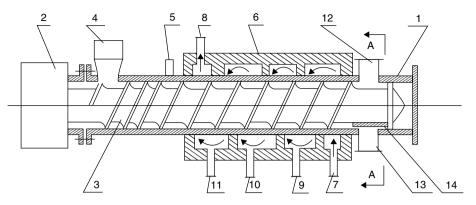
Screw pyrolyzer [2]. 1 horizontal vessel; 2 gearbox; 3 screw shaft; 4 hopper; 5 mouth for balance; 6 jacket heating; 7 inlet of heating gas; 8 outlet of heating gas; 9–11 drain pipes; 12 outlet of volatile gas; 13 char discharge; 14 baffle
